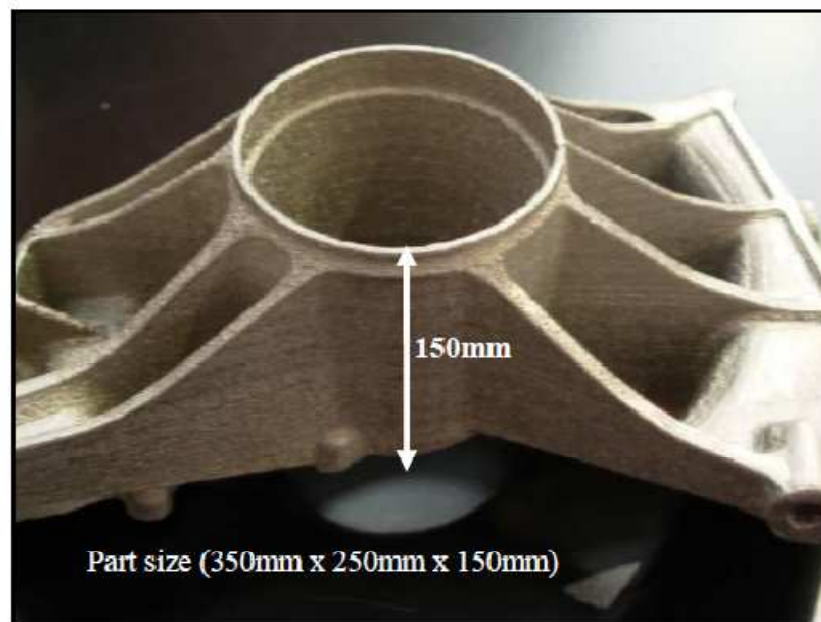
Electron Beam Melted component part with high materials waste ratio when made using CNC machining [12].
